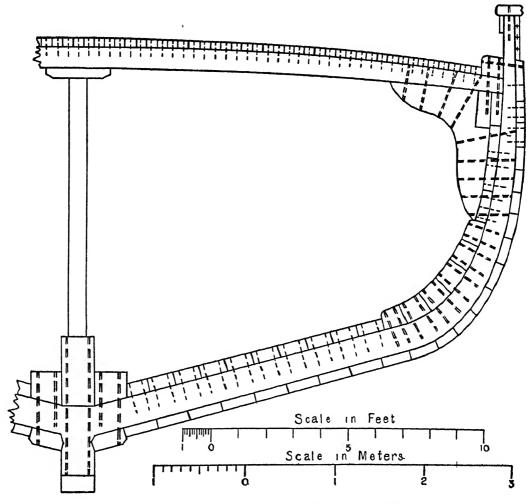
Section of the Galilee, showing Iron Fastenings
